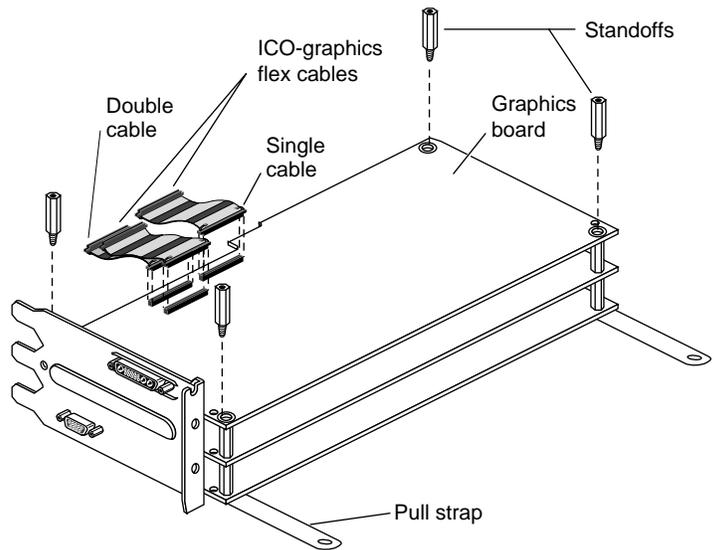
Removing the Flex Cables and Standoffs From the Graphics Board
